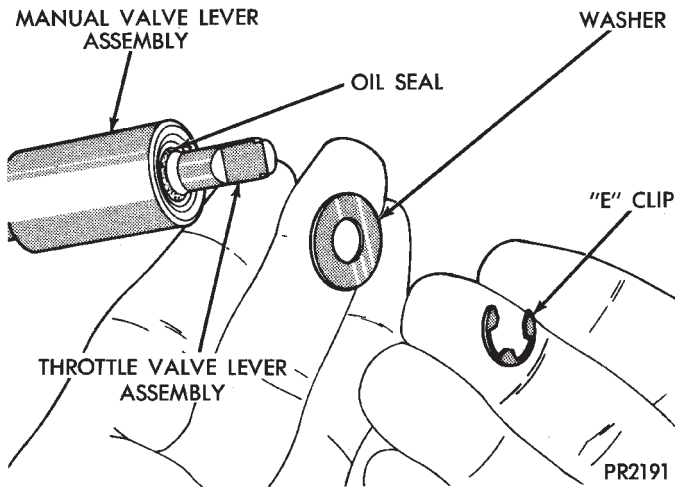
Throttle Shaft E-Clip, Washer, and Seal
